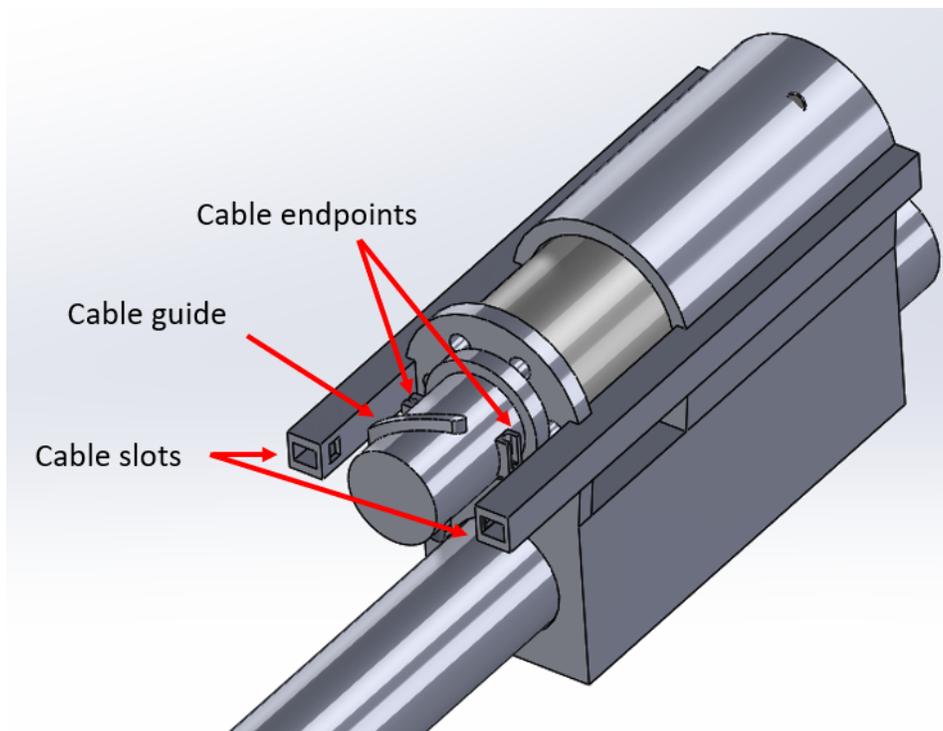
Transmission pointed on the Endo360 (grripper pointing down). The spool on the shaft of the motor shows the cable slots, guides and endpoints.
